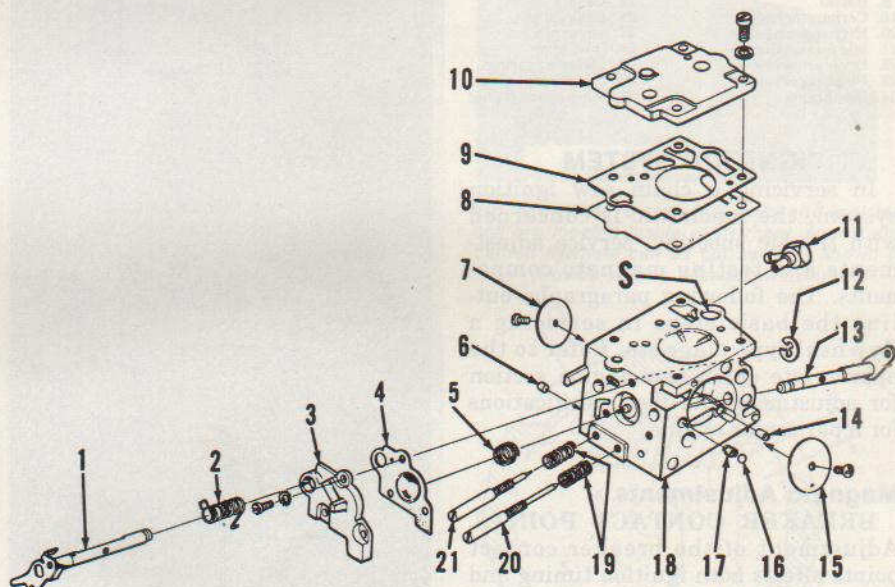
Exploded view of Walbro SDC-1 carburetor assembly except for metering diaphragm, lever and inlet valve assembly; refer to Fig. S15 for exploded view of these parts. Note that throttle shaft (1) extends through accelerator diaphragm (4) and cover (3).
